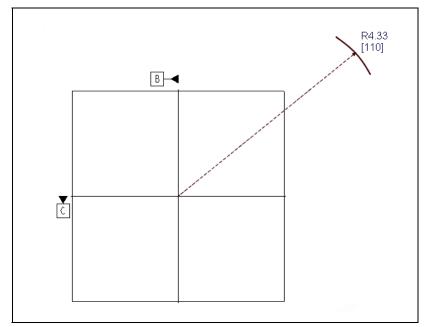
Baseboard Power Header Placement Relative to Processor Socket
